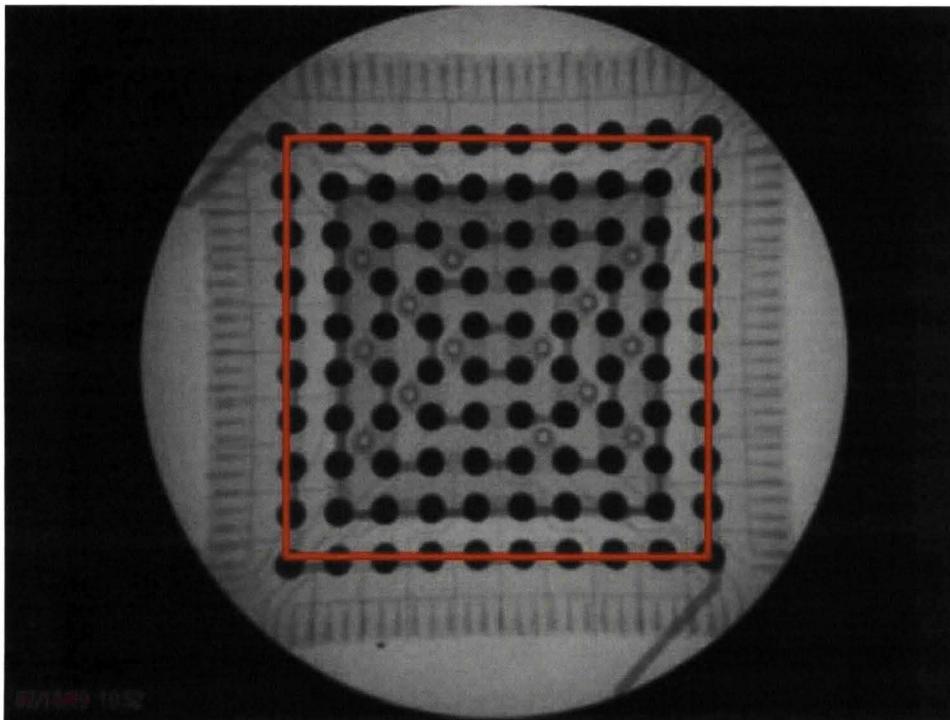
Test Vehicle 191 CLCC U10 (Cracked SAC305/SnPb Solder Joint)
